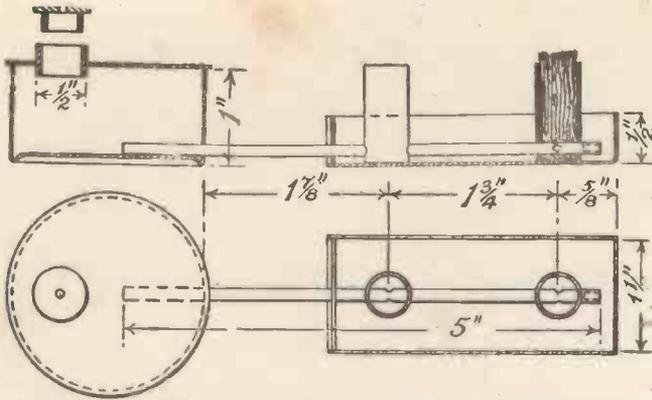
Sectional Elevation and Plan of Spirit Lamp.
